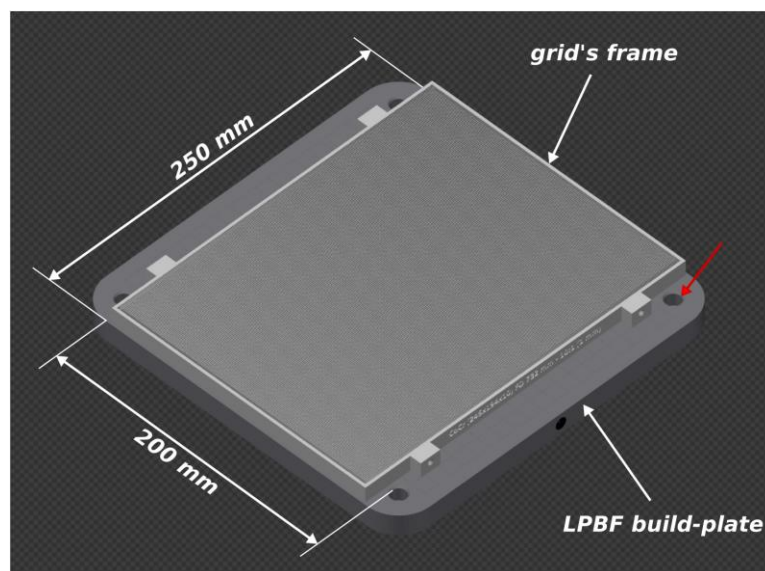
QuantAM 3D printing interface preview of grid placement in the (250x250 mm) build-plate. Red arrow shows build-plate securing clearance holes, which limited grid size in one dimension.
